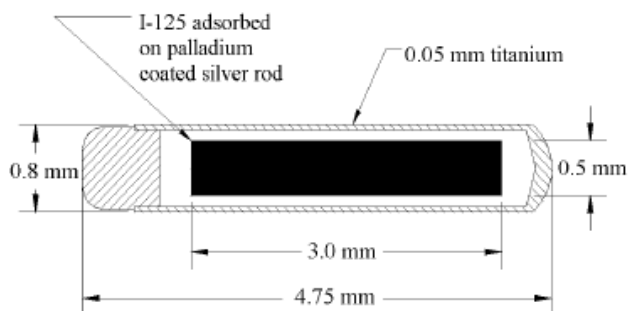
Assembly of laser welded ^{125}I seed
